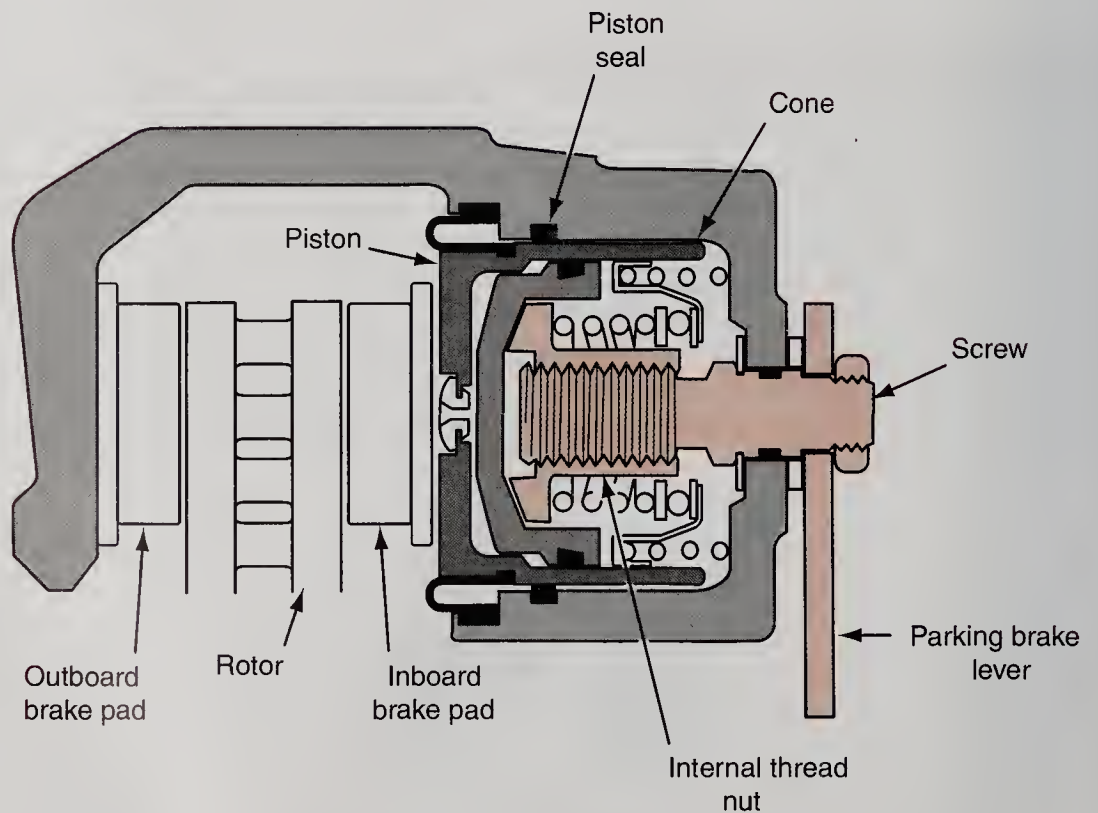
Most rear disc brakes have a lever-and-screw mechanism to apply the service brakes for parking.
